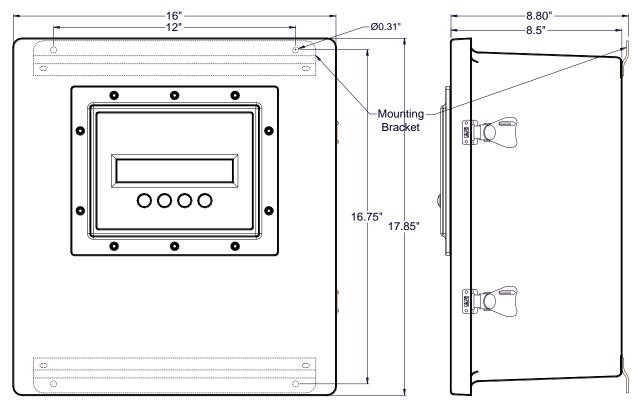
MX40-32-N4X Controller Mounting and Dimensional View
